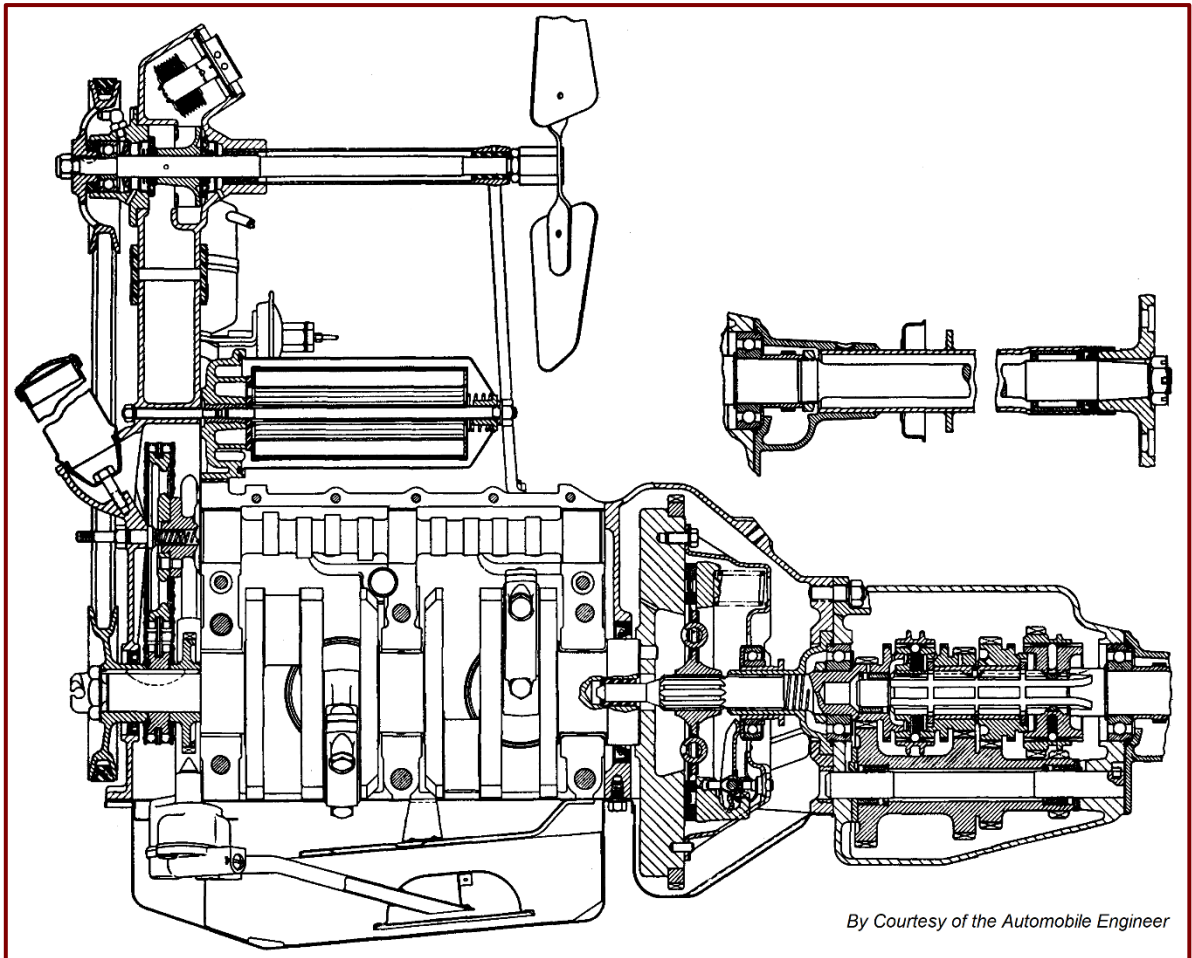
Cross Section Through Engine, Clutch and Gearbox.
